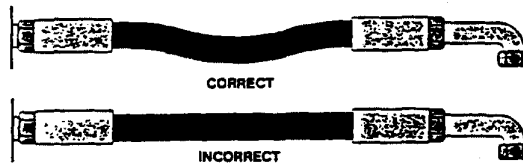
HOSE AND MACHINE TOLERANCES
